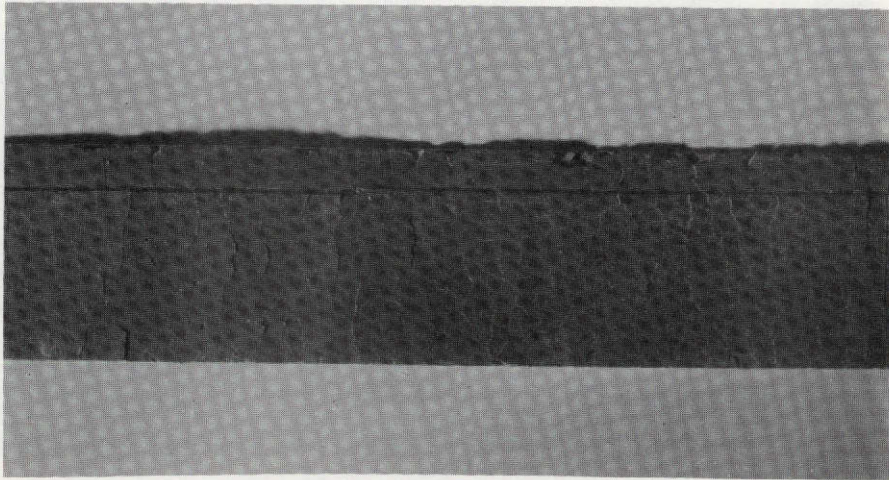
Supplier C Positive Plate After Bend Testing (TRW Photo No. 104682-73)
